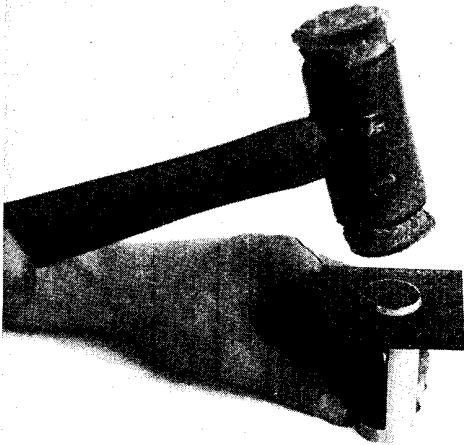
How the fixed tube is connected to the front plate. A hide-faced mallet is employed for this purpose
